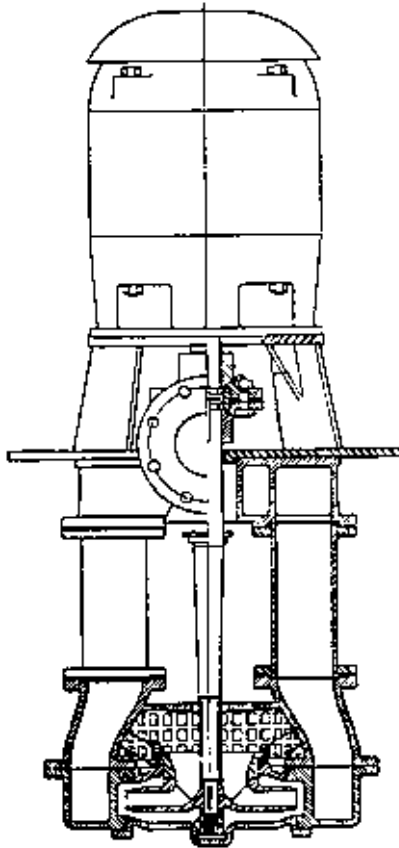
Cantilevered shaft design utilizing motor bearings (Hazleton Pumps, Inc.)
